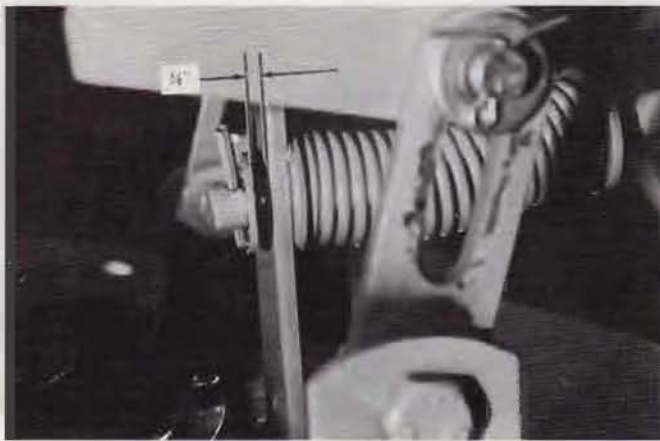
PTO Clutch (Mower Belt) Adjustment
